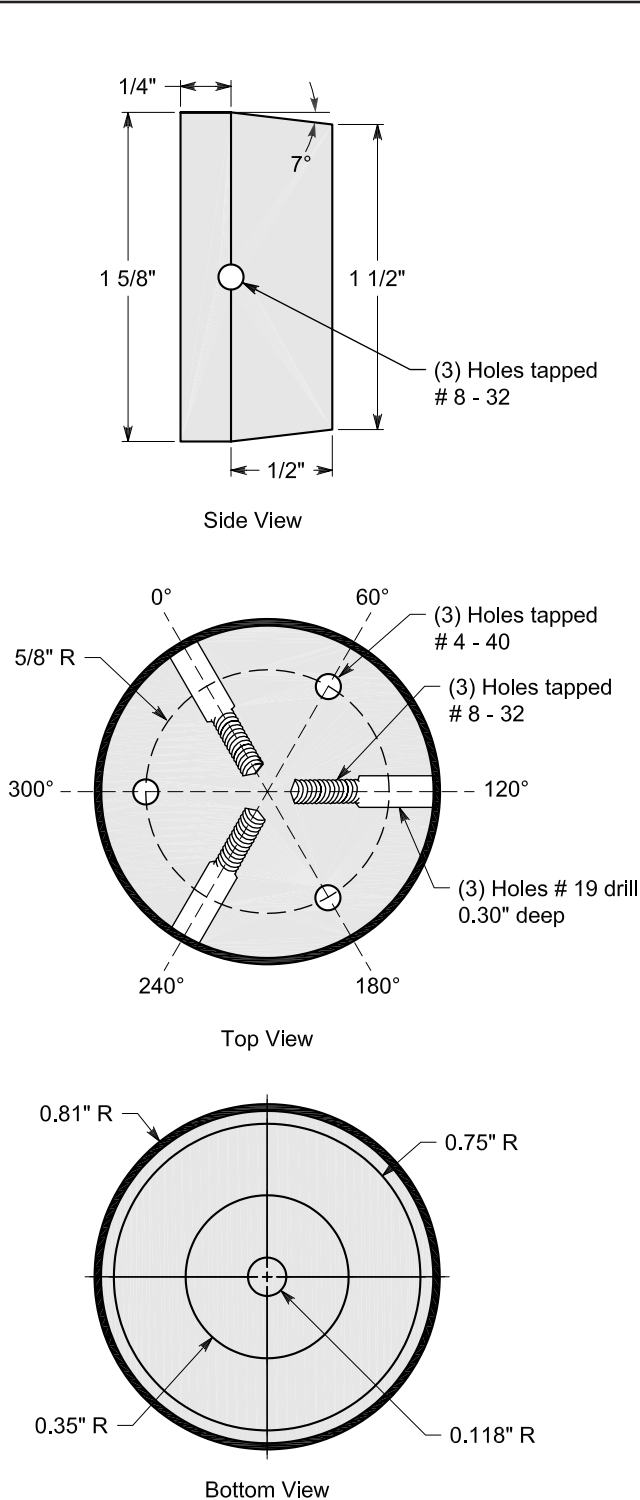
Dimensions for machining the brass lathe stock into a knob.
